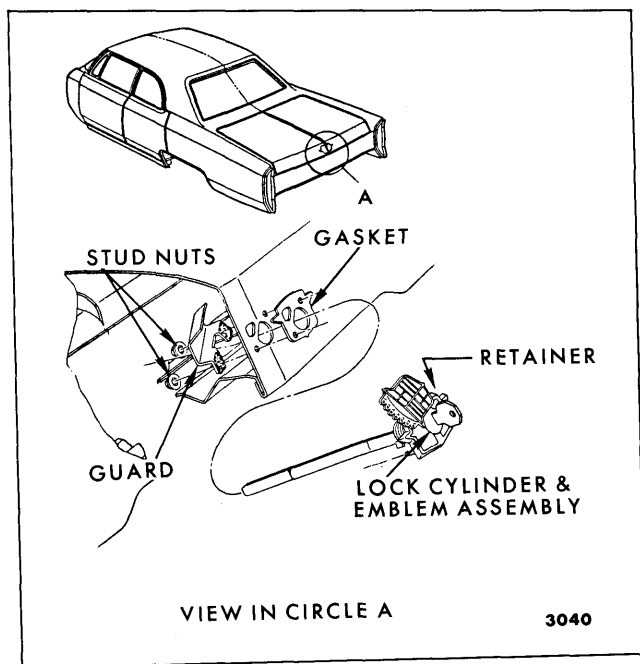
Rear Compartment Lid Lock Cylinder Assembly - All Cadillac Styles
